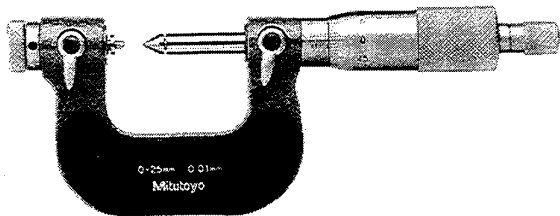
Screw-thread micrometer with interchangeable anvils and spindle tips
